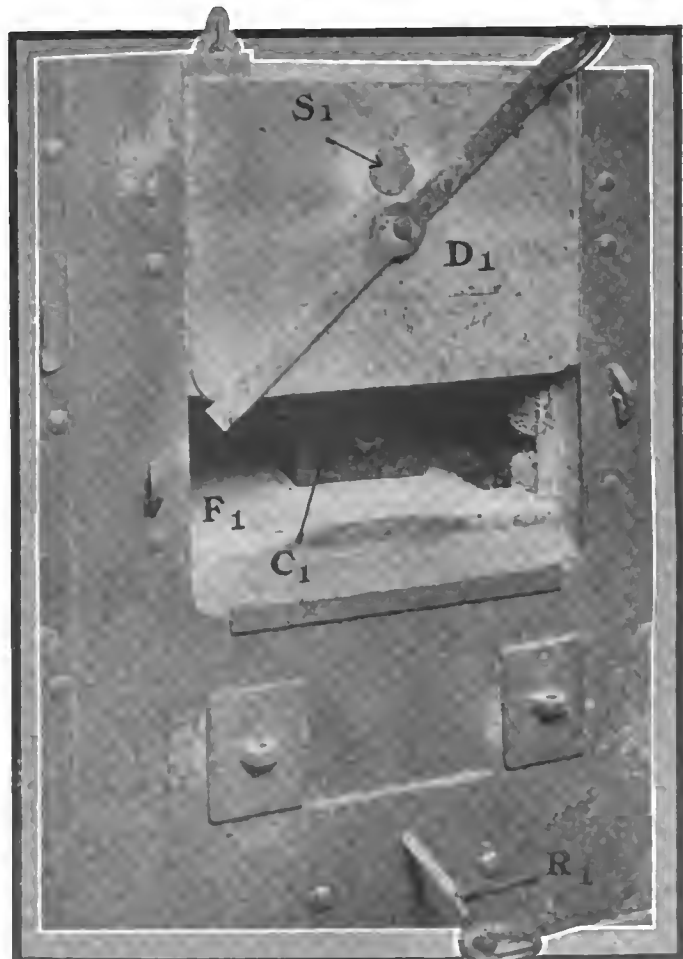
Furnace in which gears, shafts, and similar parts are heat-treated
